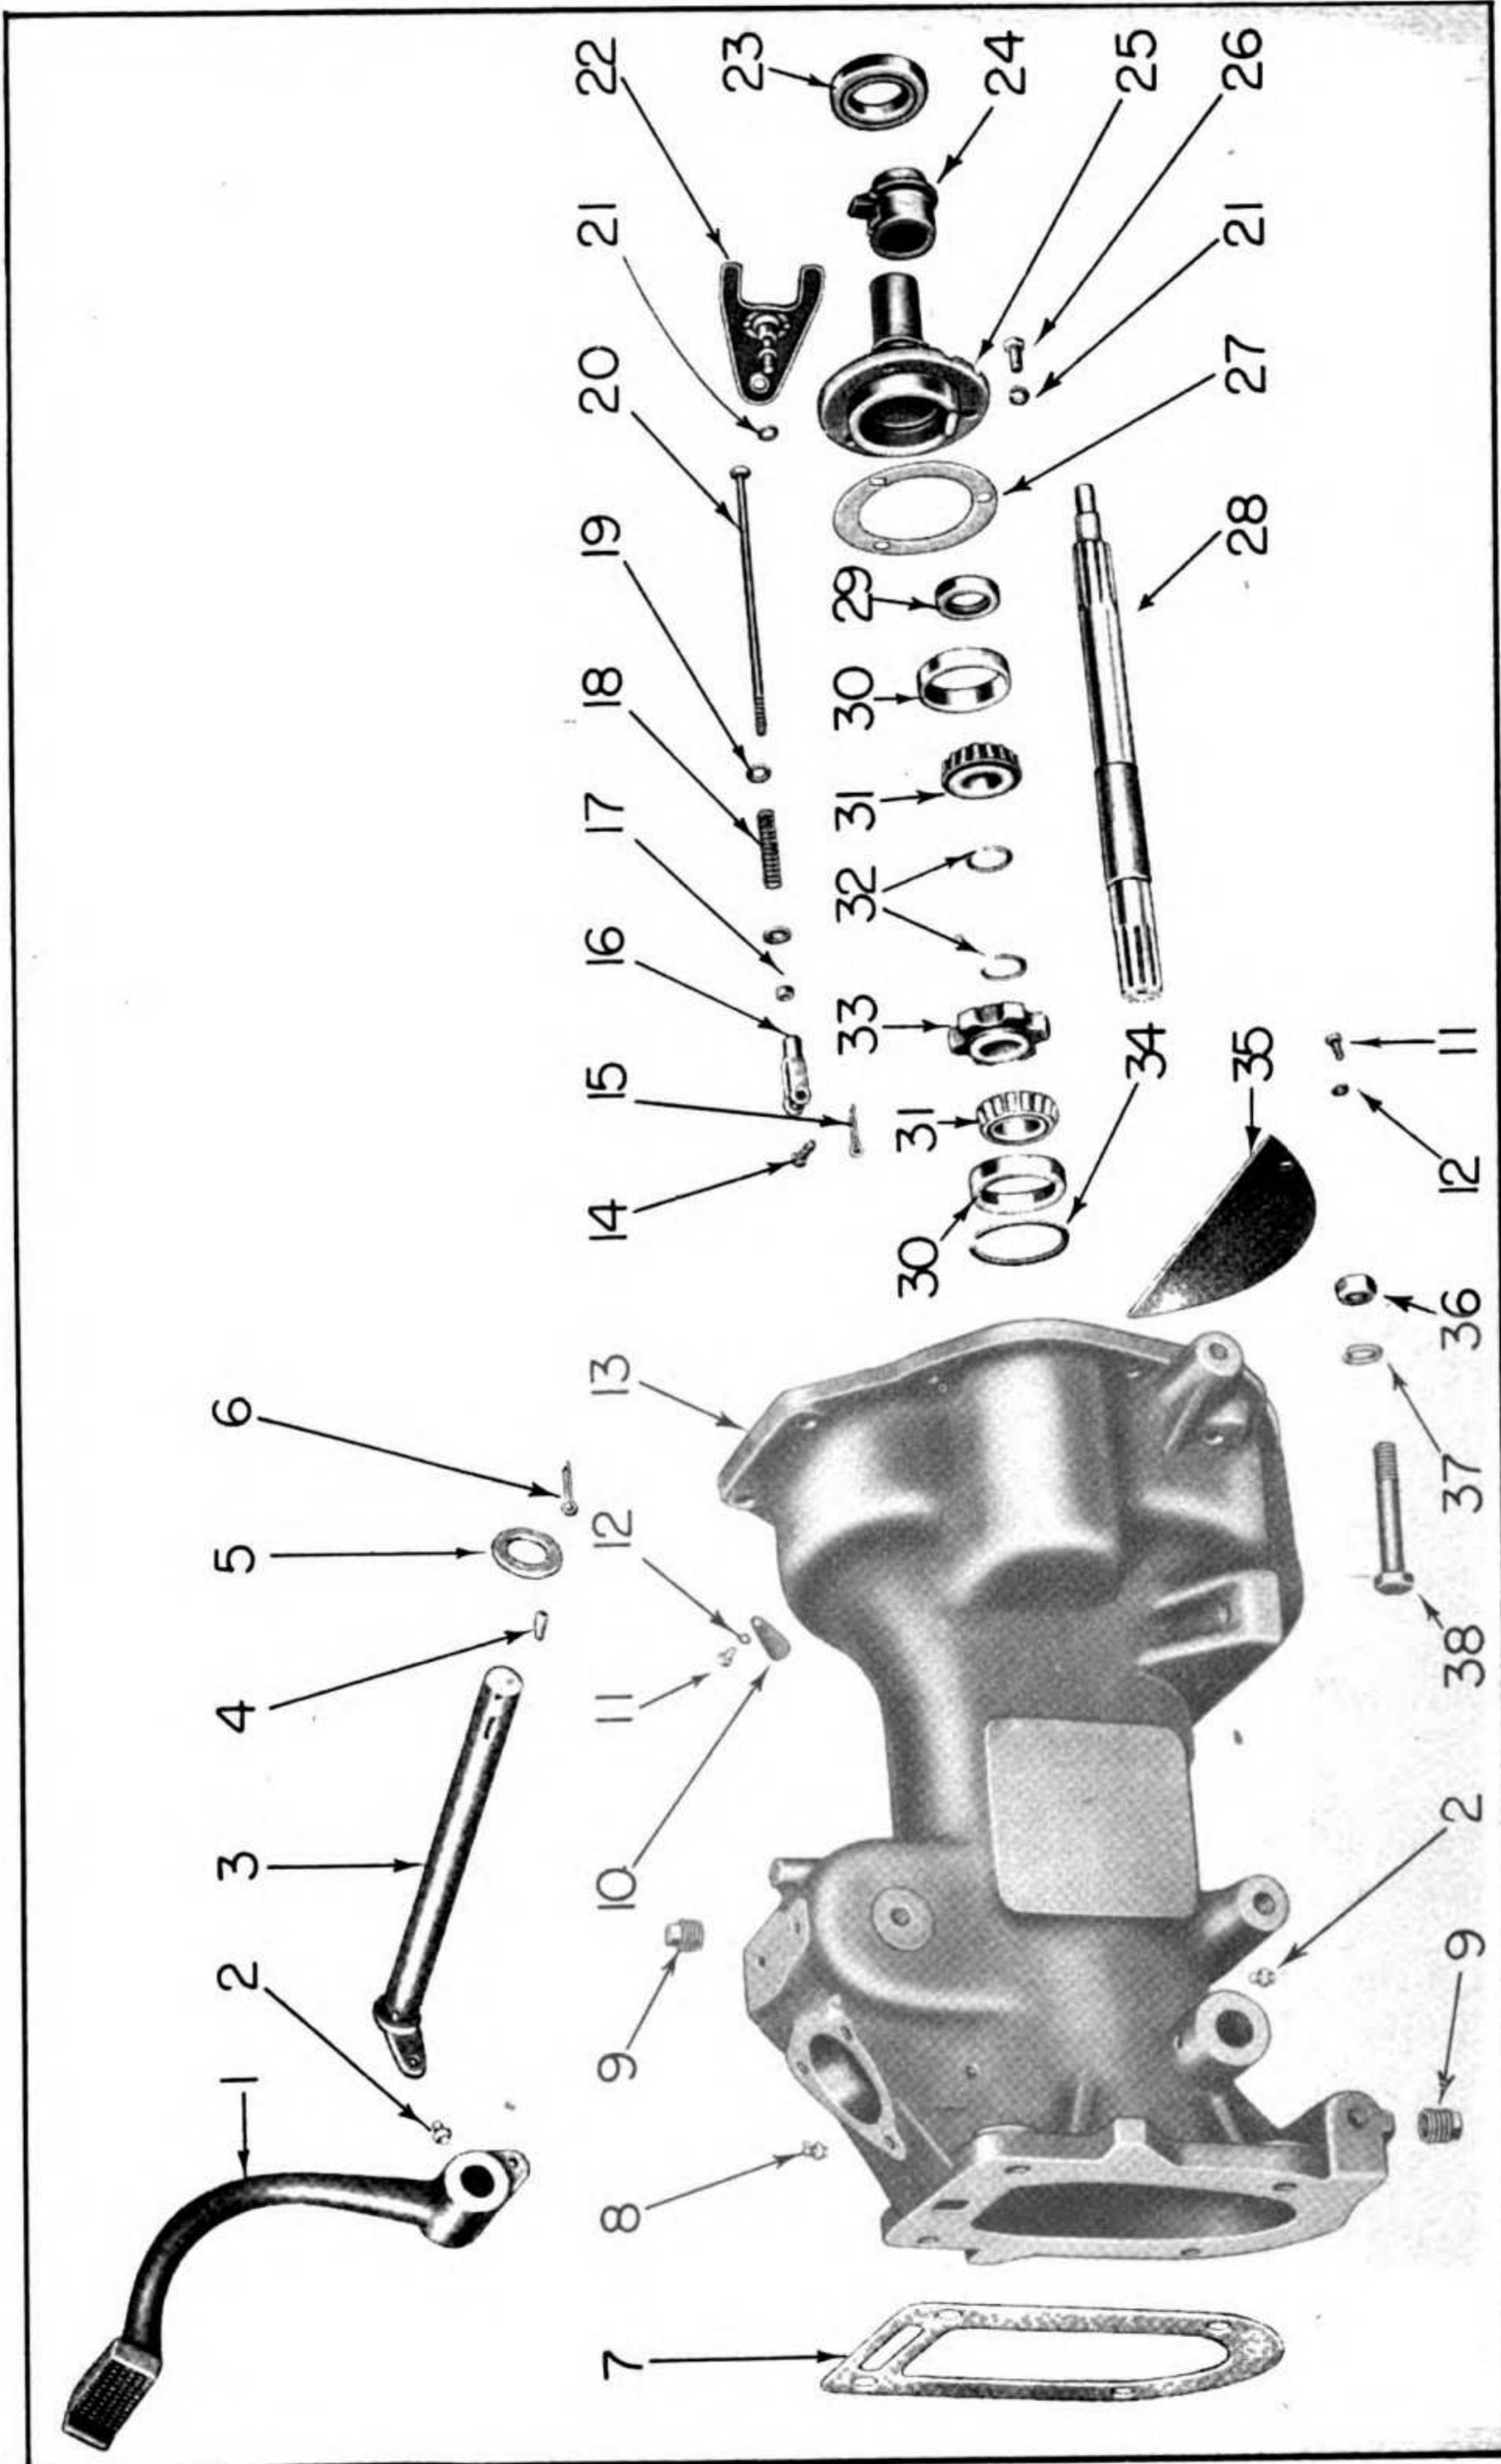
0201 TORQUE TUBE AND CLUTCH ACTUATING PARTS
